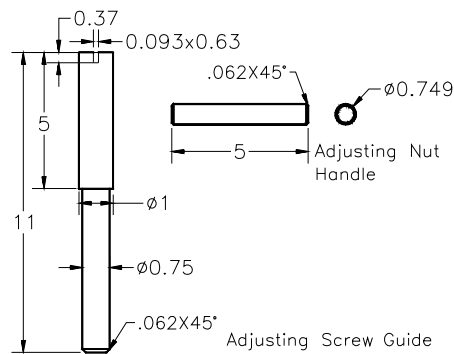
Views of the Adjusting Nut Handle and Adjusting Screw Guide
